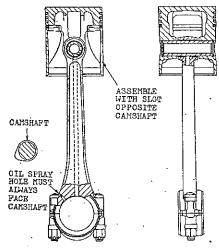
Correct assembly of piston and rod on 239, 257, 286, 331, 400 and 450 engines
